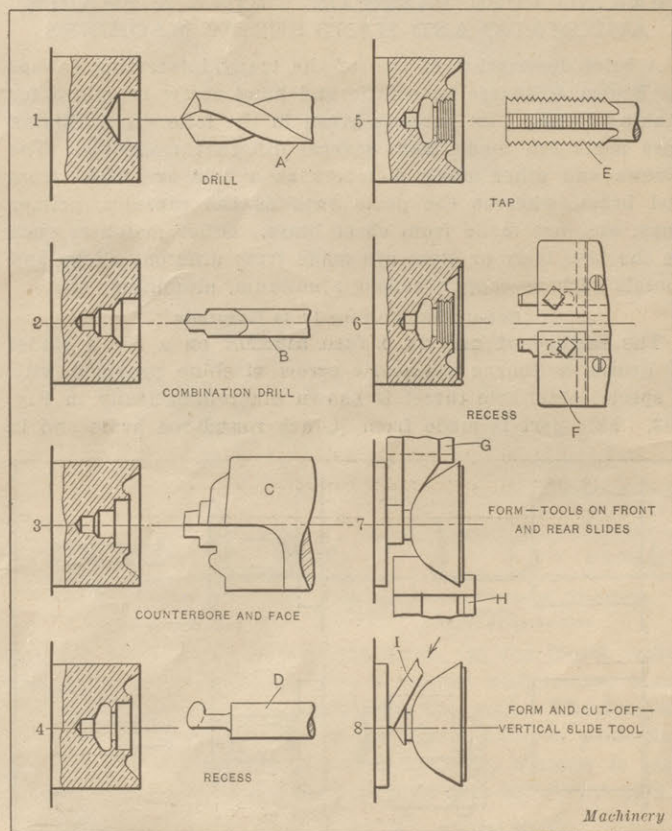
Diagram illustrating Method of machining a Fuse Nut on a No. 6 Brown & Sharpe Hand Screw Machine
